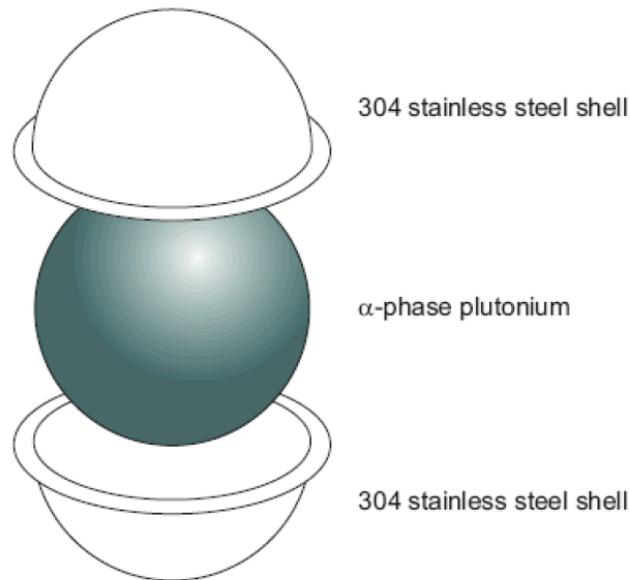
BERP Ball and Stainless Steel Cladding Hemispheres (Exploded View).
